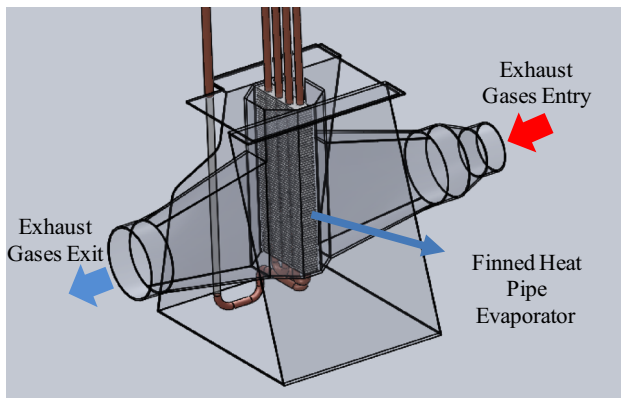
Drawing of the exhaust gases duct with the finned HP Evaporator inside (6 pipes with 8 mm outer diameter).
